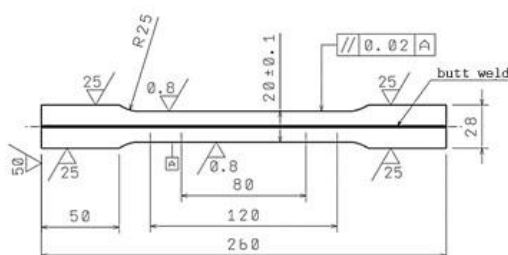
Specimen shape and dimension for tensile test with laser joint.
